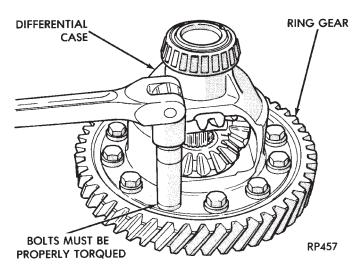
Remove or Install Ring Gear Bolts and Ring Gear
